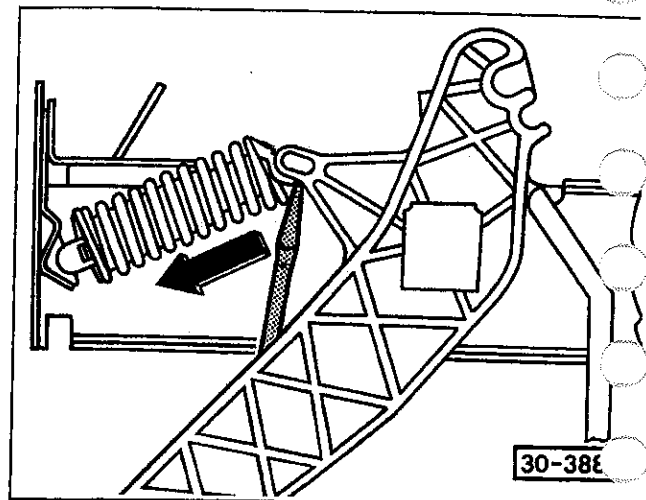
Insert screwdriver between steering column and clutch pedal, then depress clutch pedal and disconnect spring by levering off pedal lug (direction of arrow).
